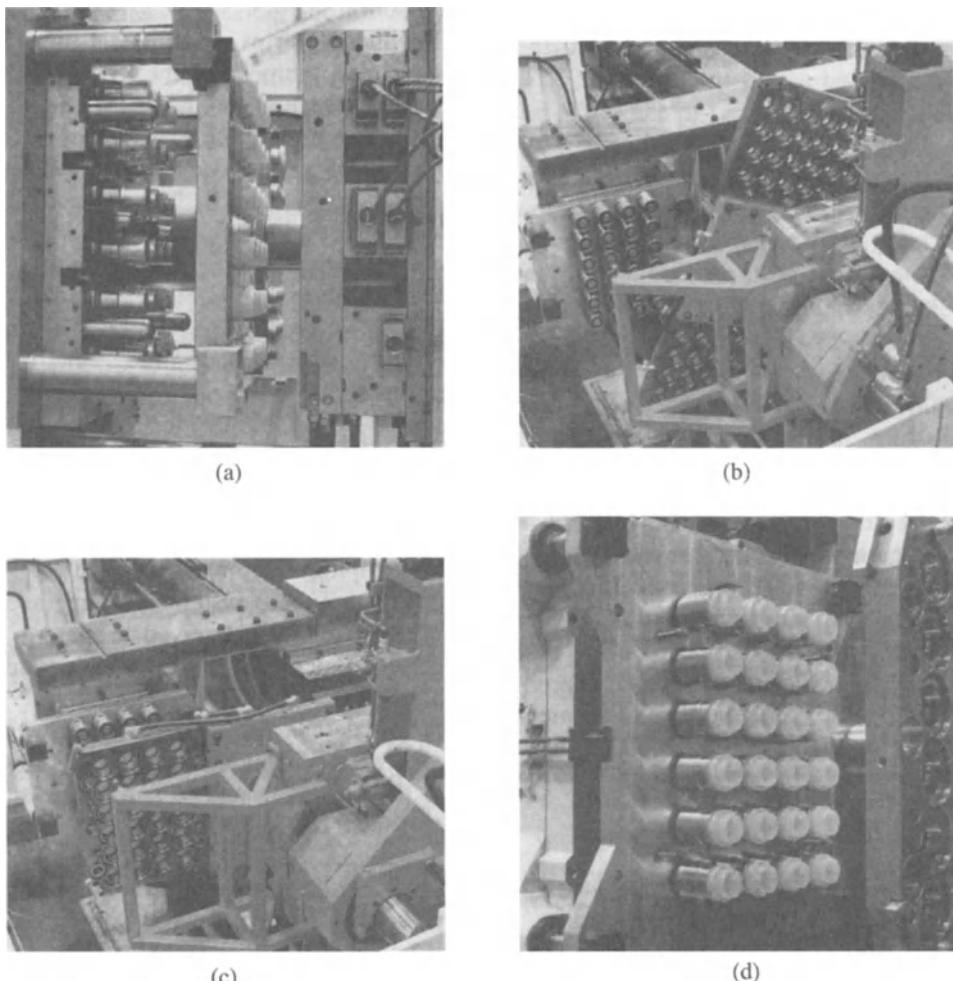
Views of Husky's unscrewing system that molds bottle caps. (a) Mold opens with caps remaining on the cores. (b) Core plates rotate 180° on the third tie-bar. (c) Molded products are accurately aligned with the unscrewing chucks. (d) Mold closes to begin another cycle.
